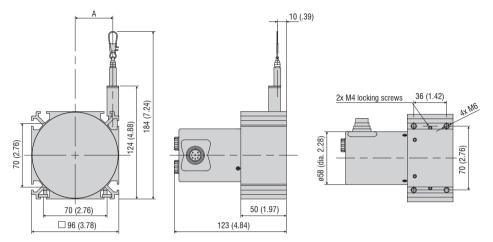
Dimensional drawing WDS- ... - P96 - SR - U/I, dimensions in mm (inches, rounded-off)
